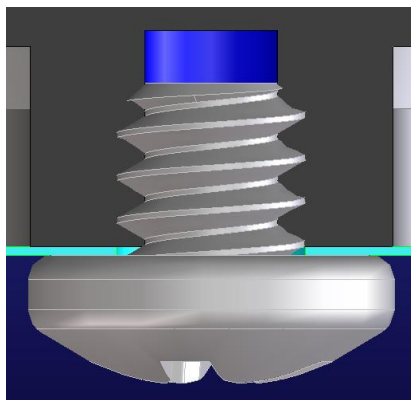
Bottom mount OEM hole, 6-32UNC X 1/8" (3.8 threads engagement)
